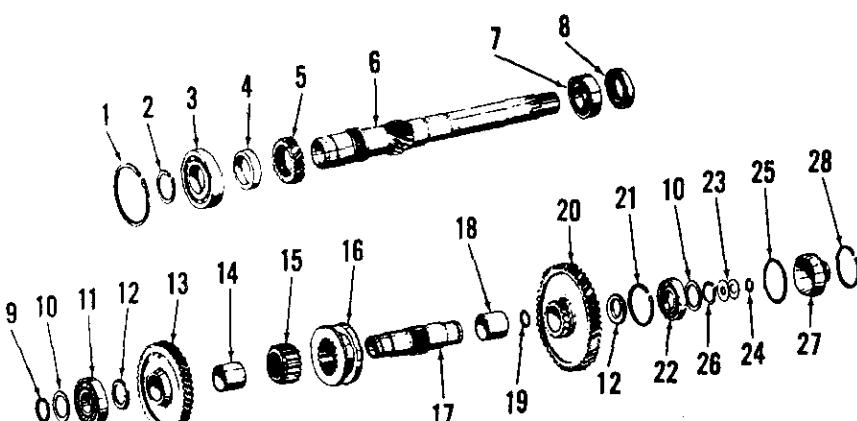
Exploded view of dual speed pto driving shaft, pto countershaft and their component parts used on some Series 354, 364 and 384 tractors.
